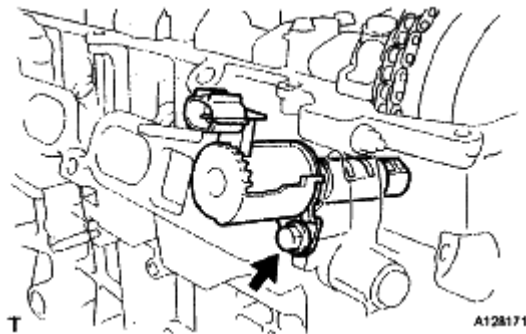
Locating Camshaft Timing Oil Control Valve With Bolt
